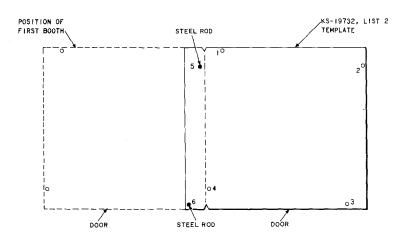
Left to Right Layout for Drilling Mounting Holes
